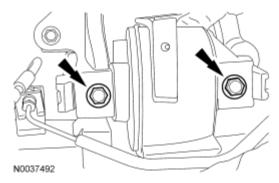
Locating Transaxle Mount Bolts Courtesy of FORD MOTOR CO.
